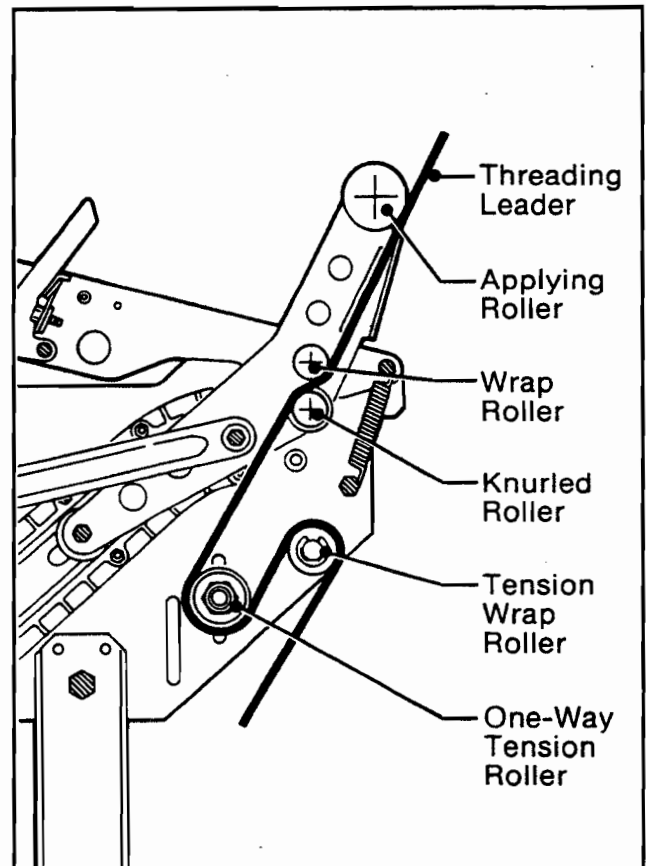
800a/800a3/800ab - Lower Taping Head
